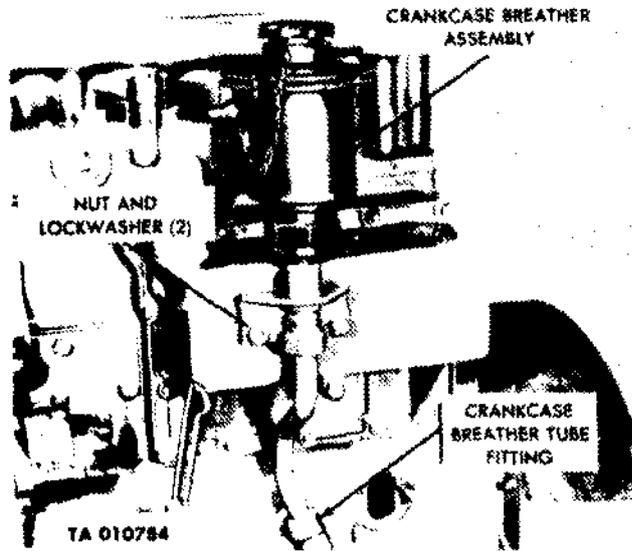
Removing crankcase breather bracket and tube assembly.
